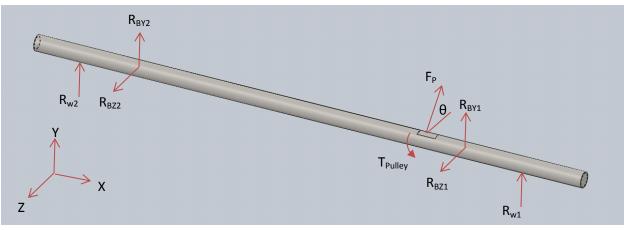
Simplified FBD of Front Shaft. Note: X dimensions removed.
